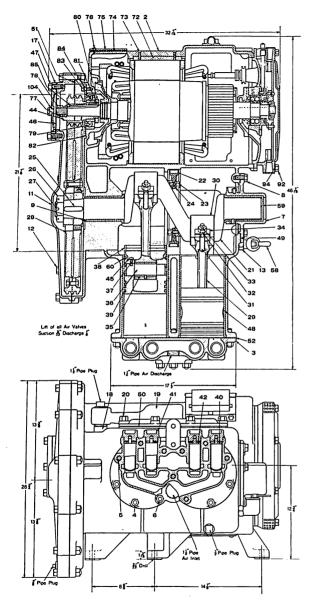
Outline and Sectional Views of the XD-3-F Air Compressor
